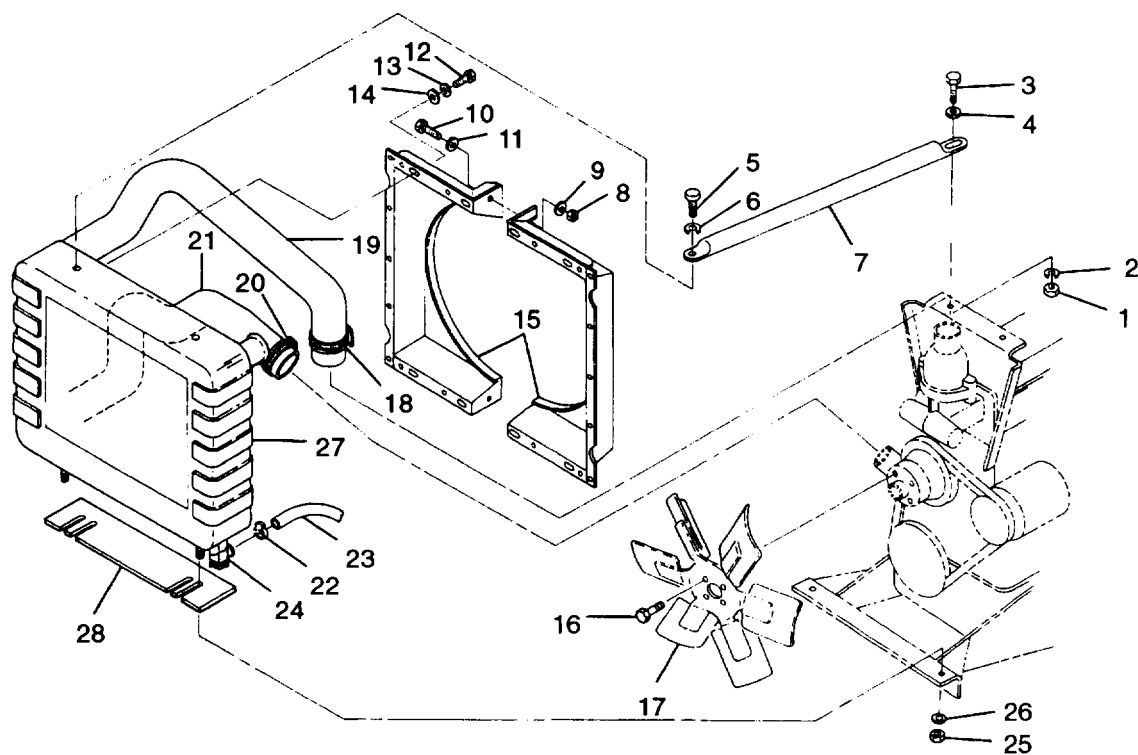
Radiator Assembly, Shroud and Fan
